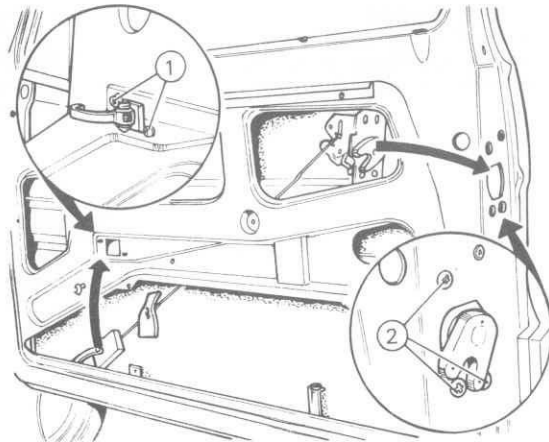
6 Fixing screws for door lock remote control 1 and lock mechanism 2
